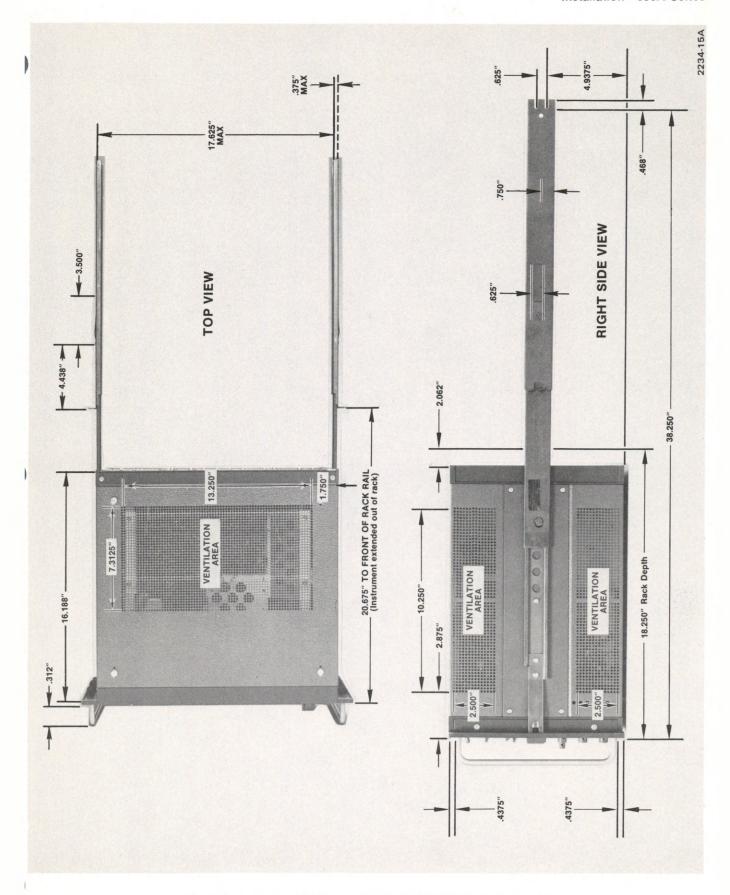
Dimensional illustrations for top and right side of instrument.
